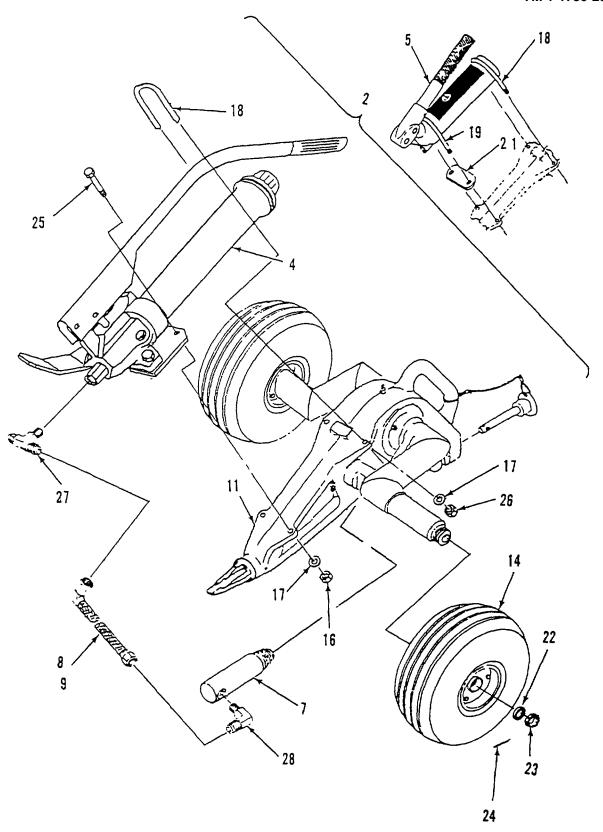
Ground Handling Wheels Assembly, P/N 214-706-104-101
